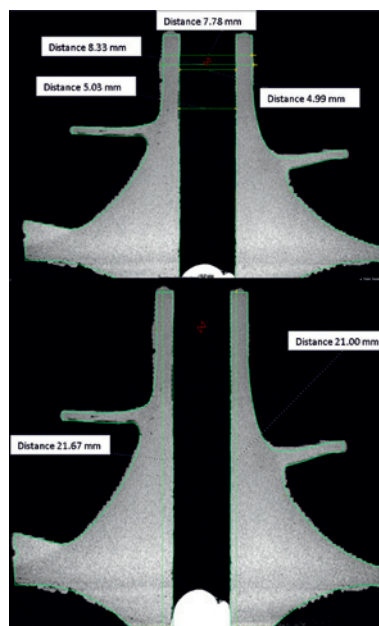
Measurements of geometric parameters in X-Y cross-section of compressor rotor produced using FDM method
